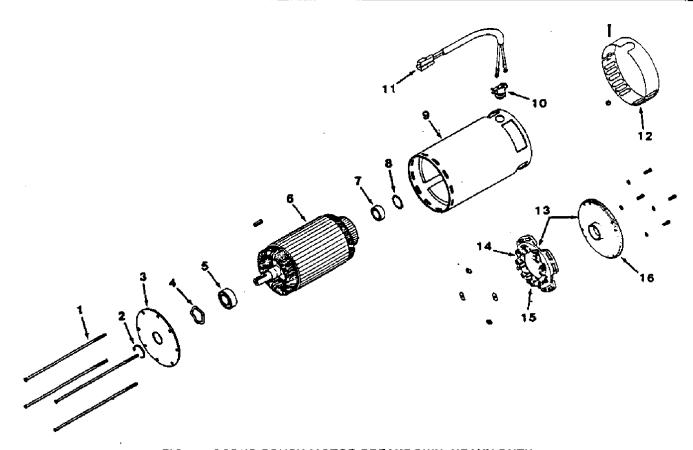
SCRUB BRUSH MOTOR BREAKDOWN, HEAVY DUTY
